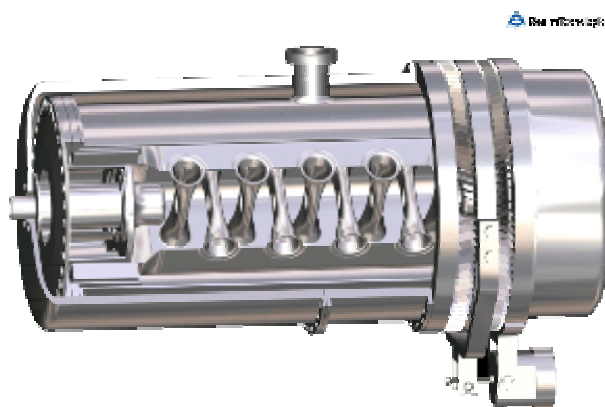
Provisional design of 10-gap H-cavity with “drossel” end plate joints and DESY-INFN blade tuner.
